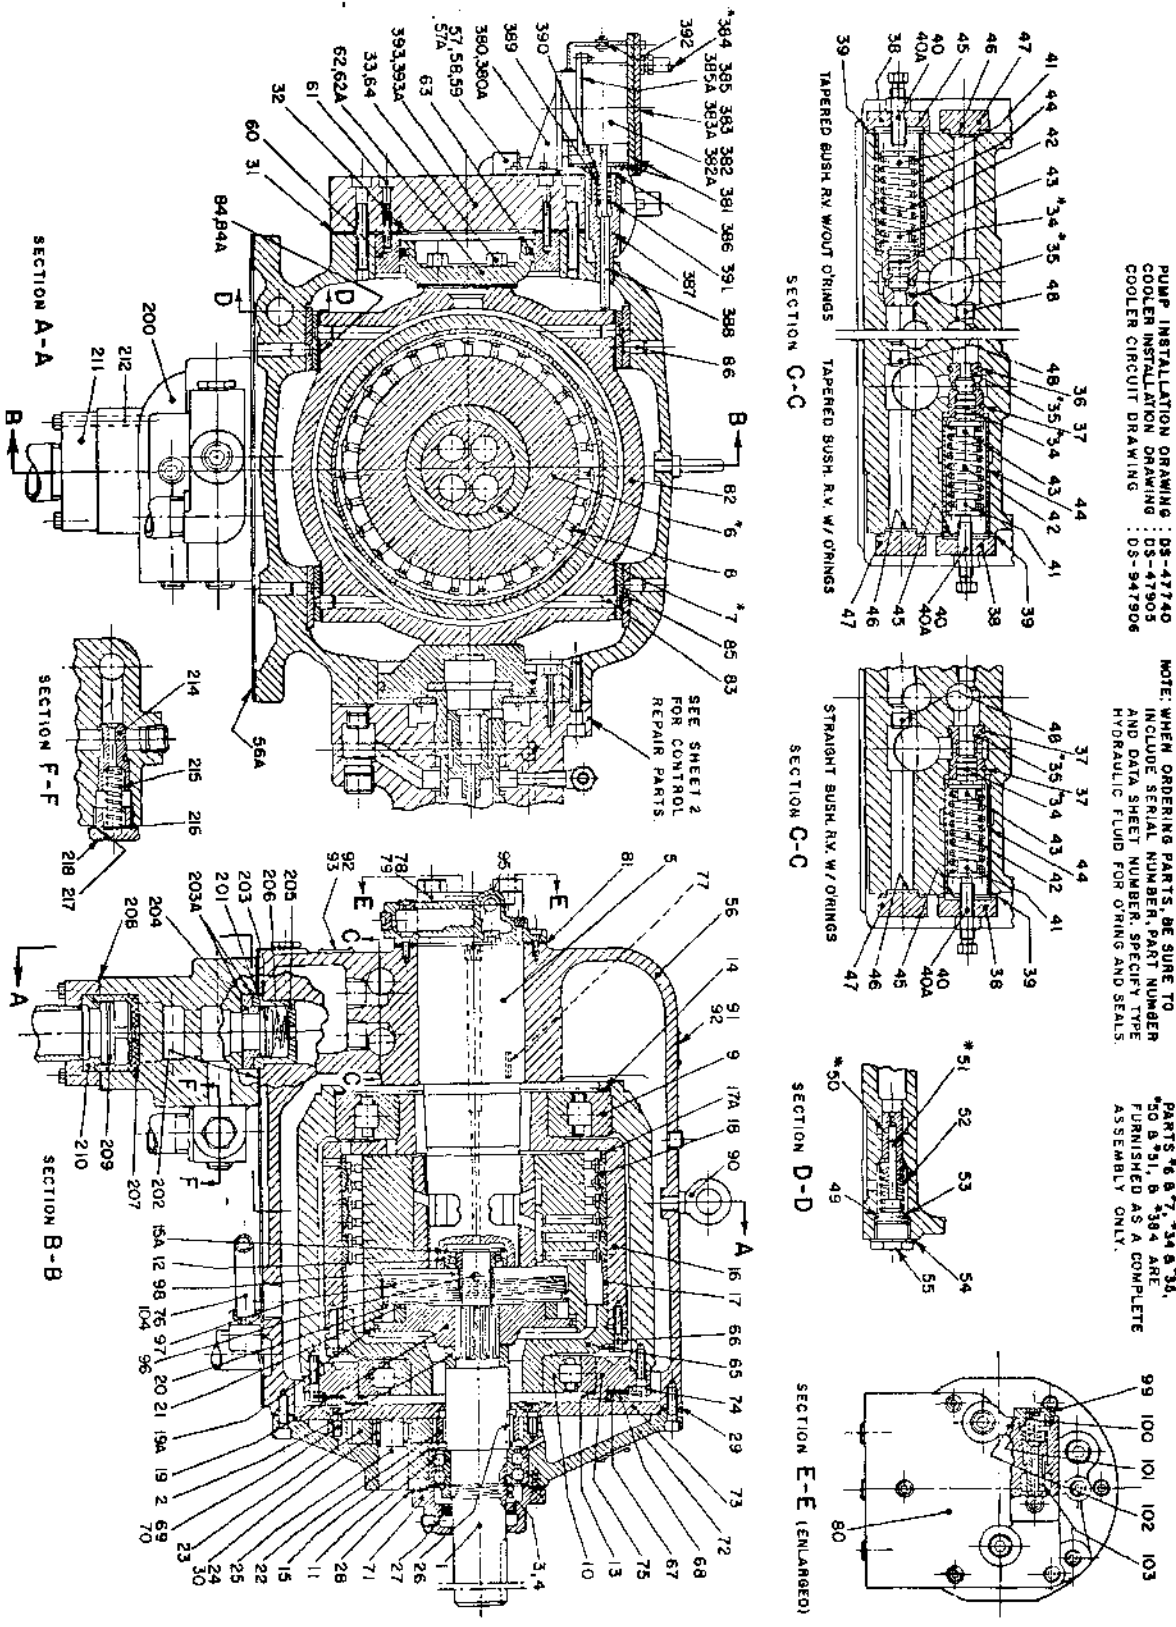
Type "DV" Pumps (Sizes 4-60) parts Drawing (500847-A) (DS-947740-A, sh. #1)
